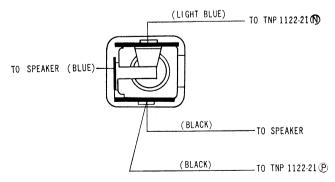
EARPHONE SOCKET (REAR VIEW)
